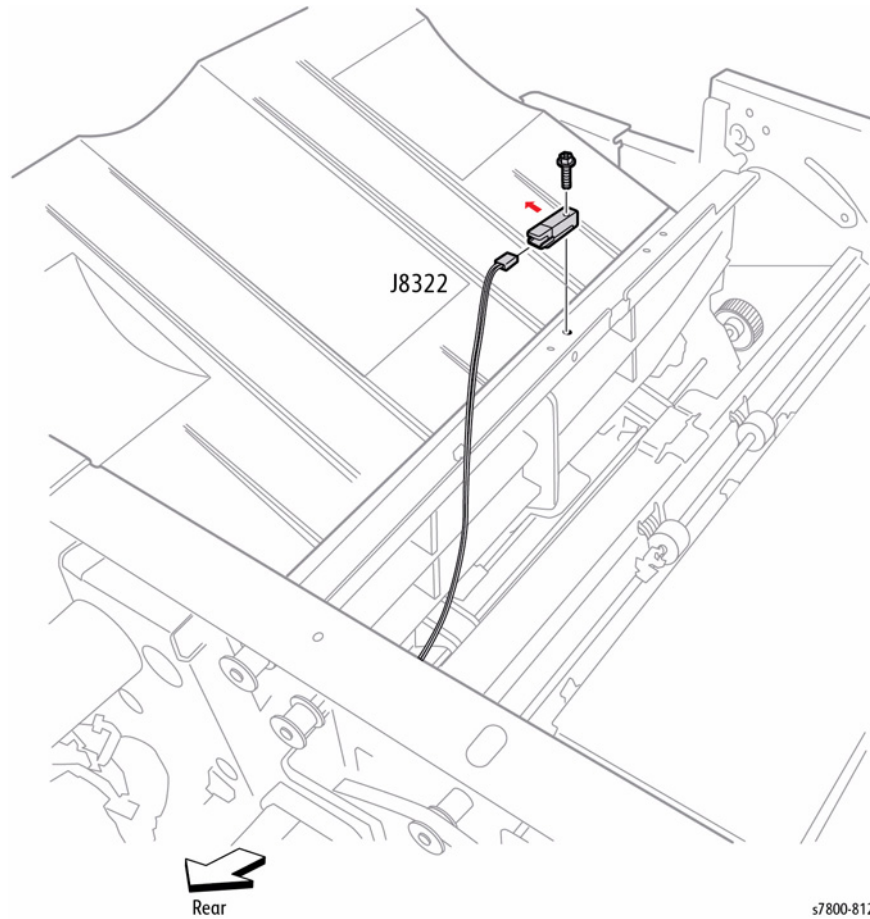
Removing the Stacker Upper Tray Full Stack Sensor
